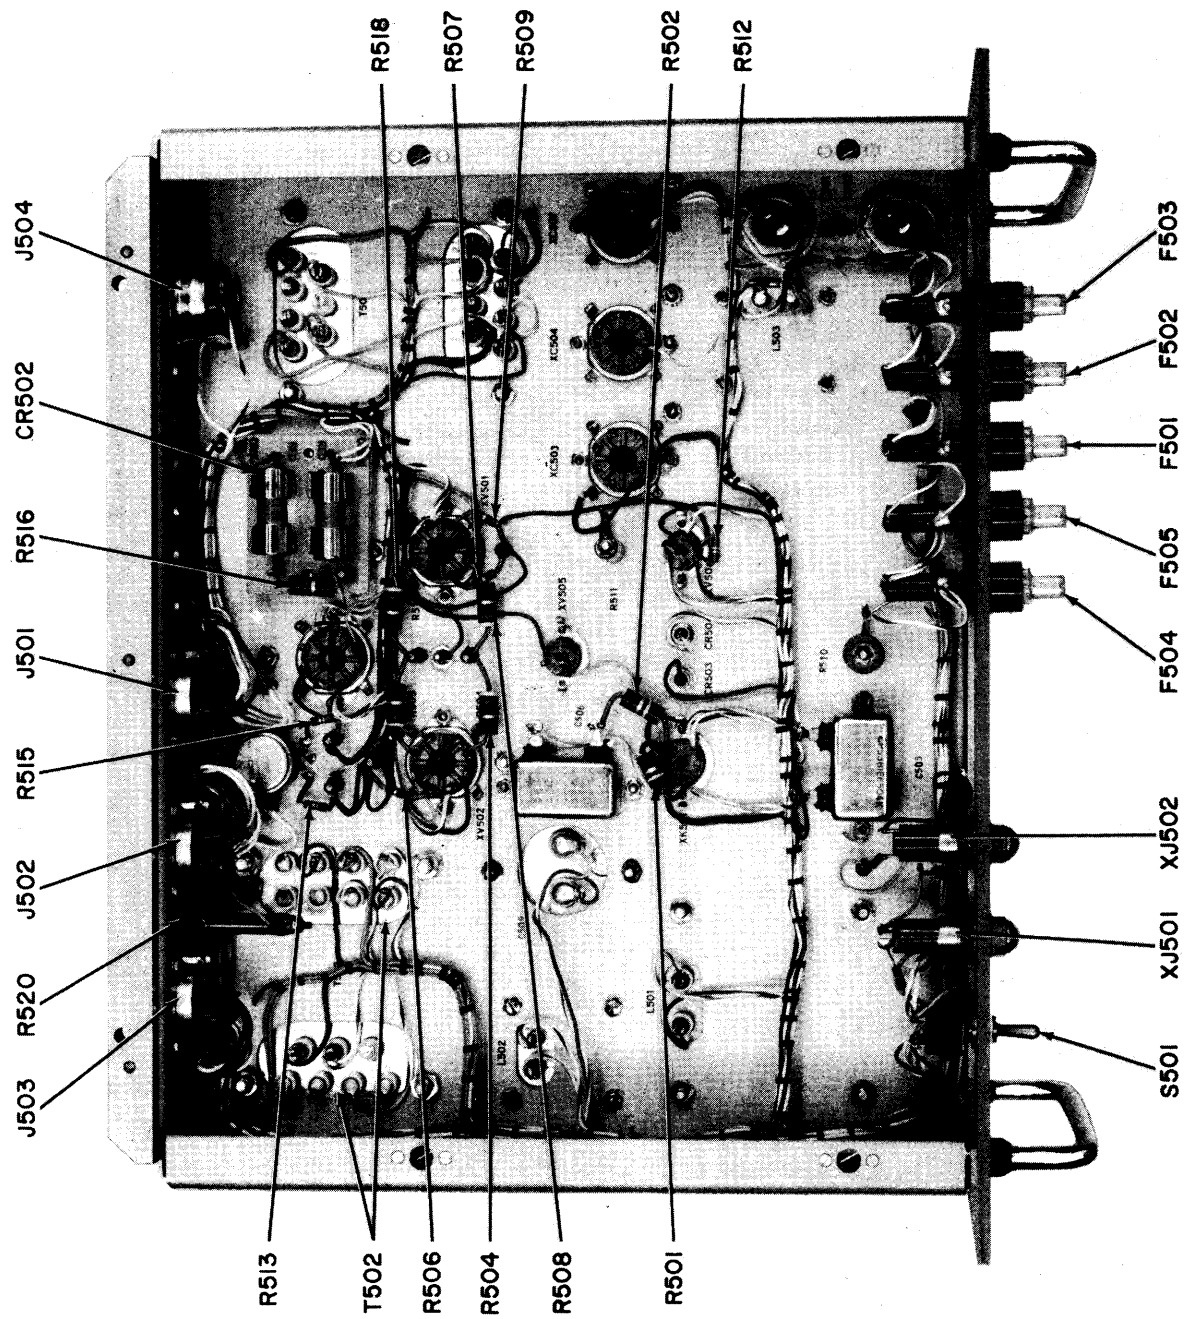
Location Diagram of Major Electronic Equipment Components, Bottom View
